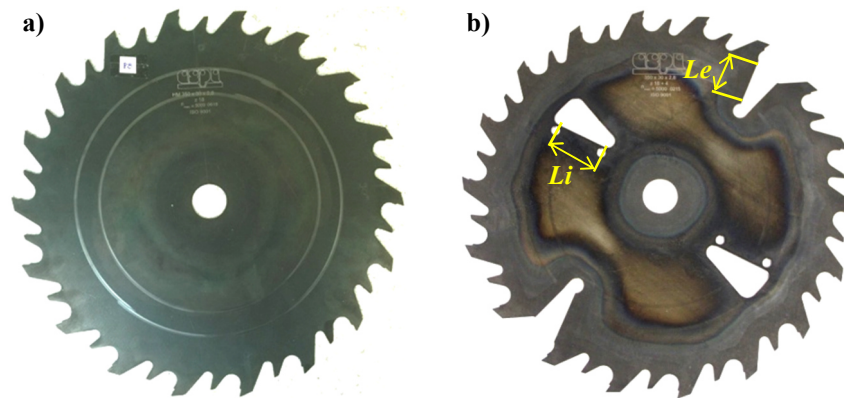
Tested circular saw blades: a) saw blade P8 with homogeneous blade, b) saw blade P1 with internal holes and external cuts for cleaning knives, Le – length of the external cleaning knives of circular saw blades, Li – length of the internal cleaning knives of circular saw blades
